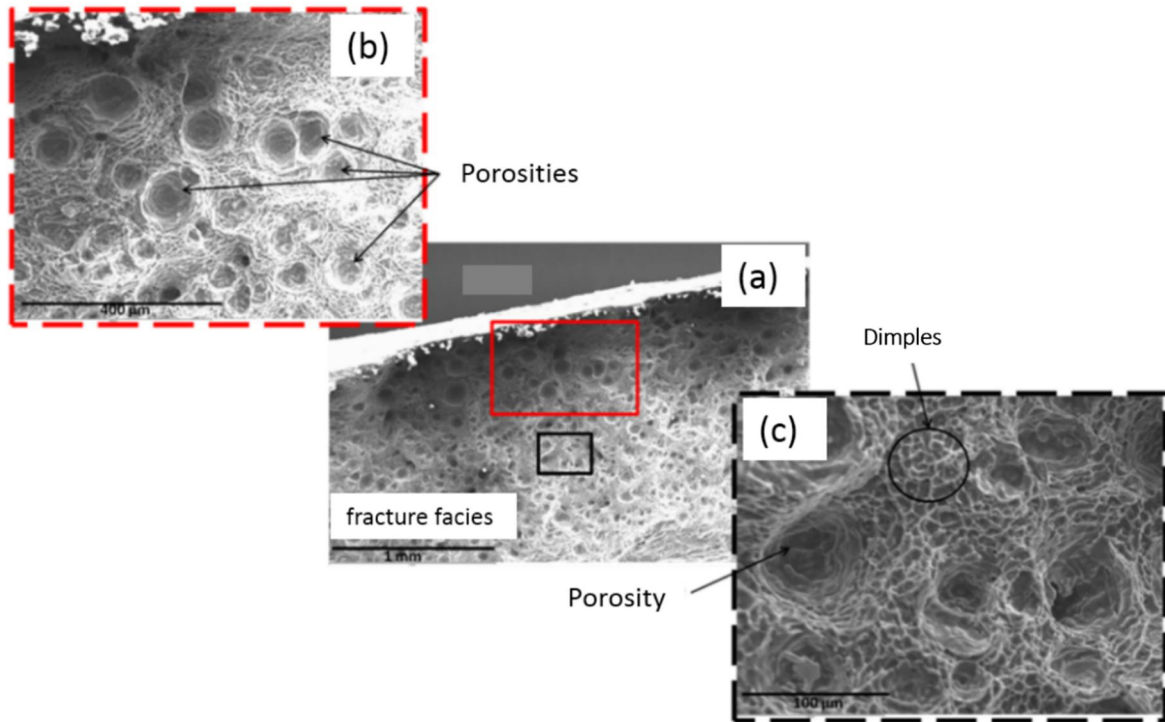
SEM observations of the fracture facies of the V30 assembly.
